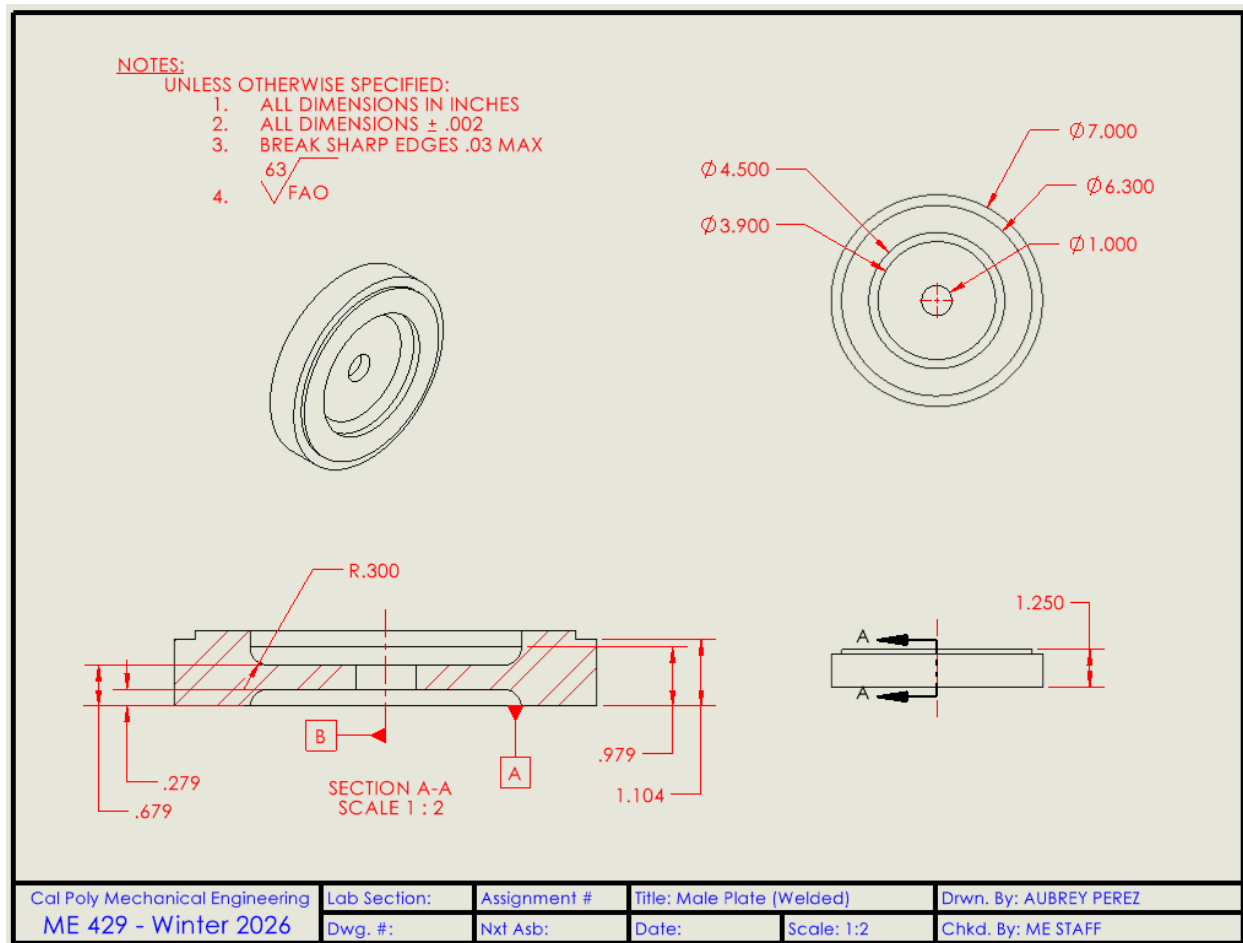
Detailed drawing of Male Plate for assembly 3000
